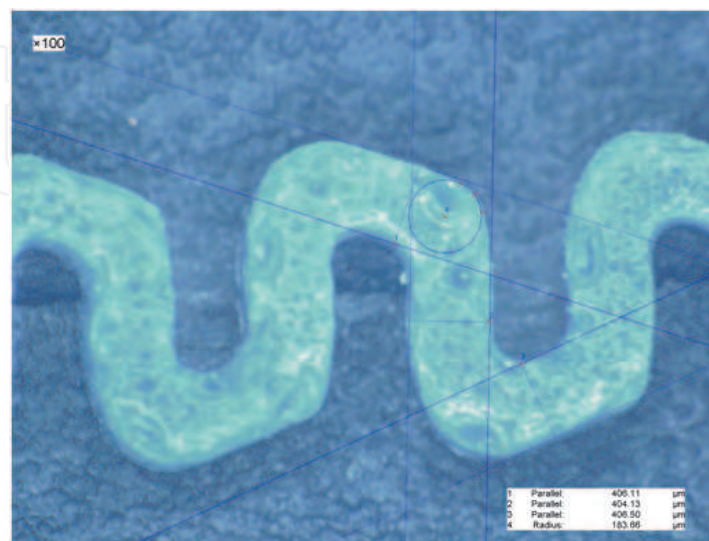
Dimensions measurement on oblique teeth channel sheet-dropper
